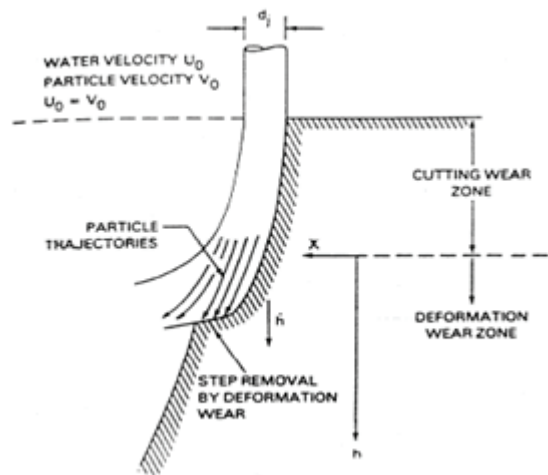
A schematic of mechanism of material removal in water jet machining [1]
